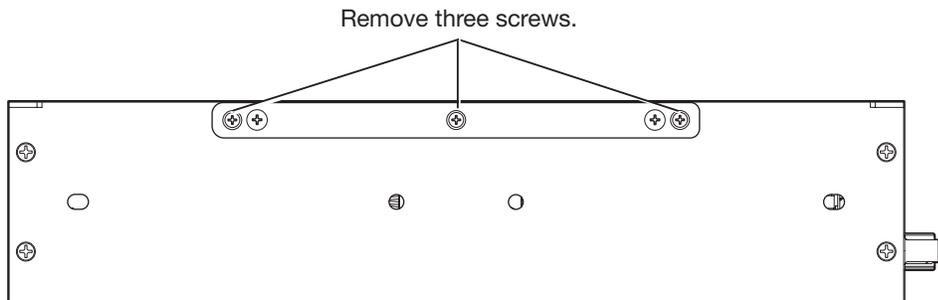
Removing the Metal Strip from the Failed Redundant Power Supply Back Panel
